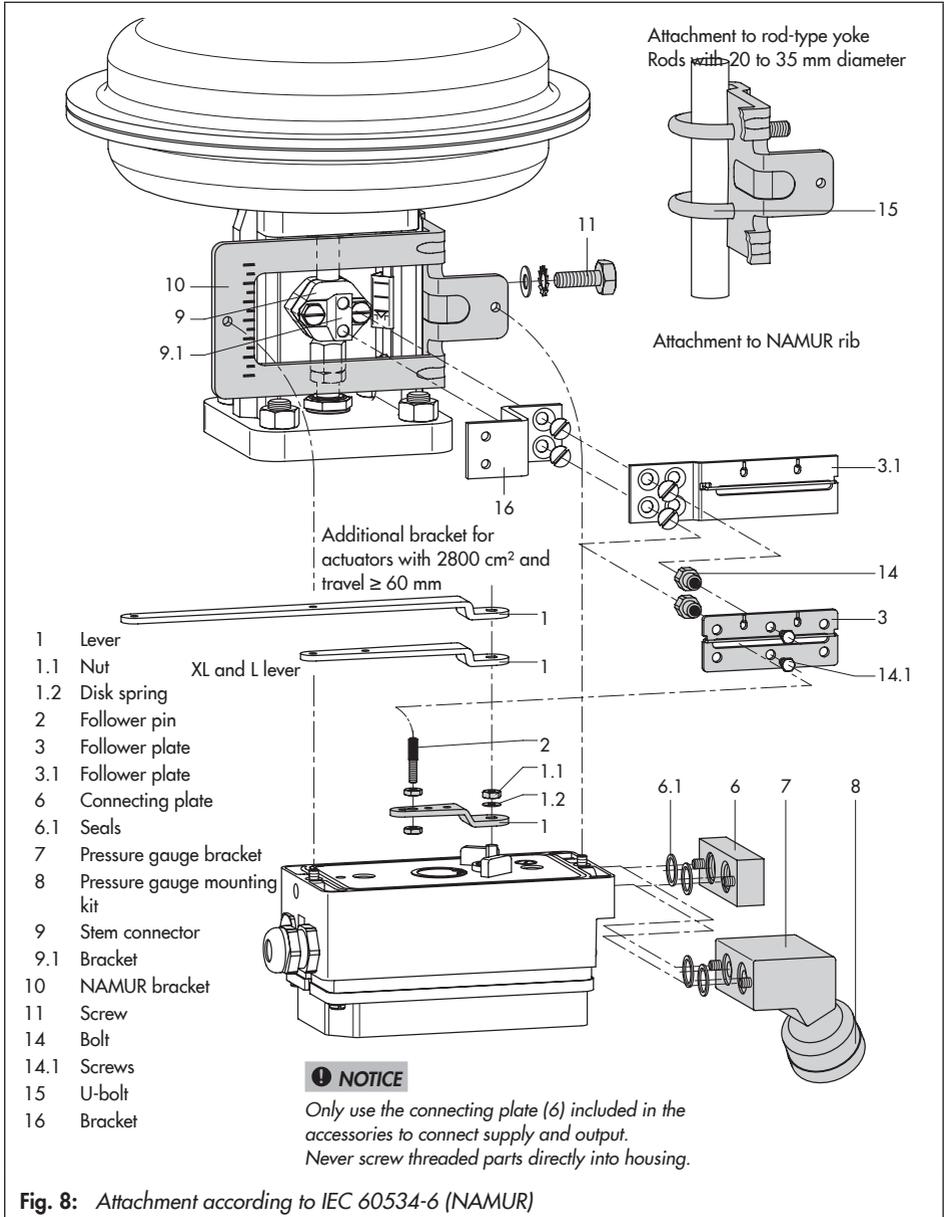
Attachment according to IEC 60534-6 (NAMUR)
